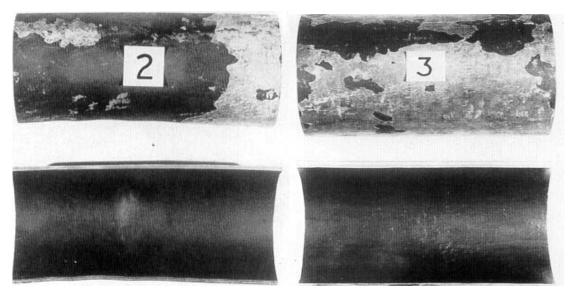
The same part. The traces of prewelding heating can still be seen intact after 10 years.
